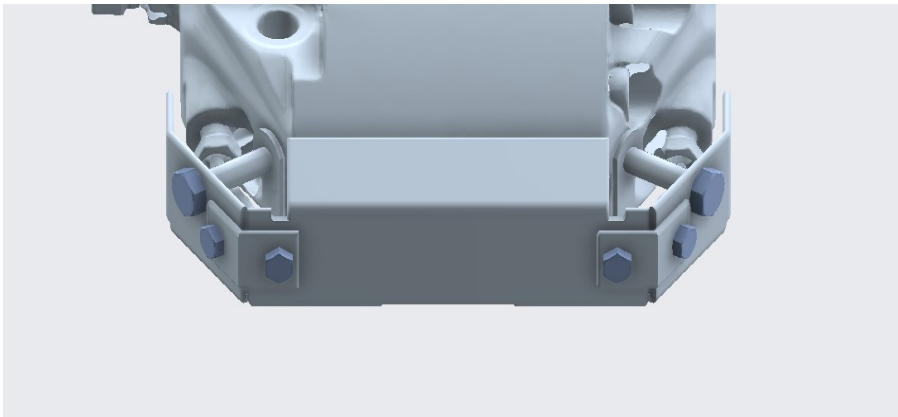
Location of the two welds in blue on prototype 3.
